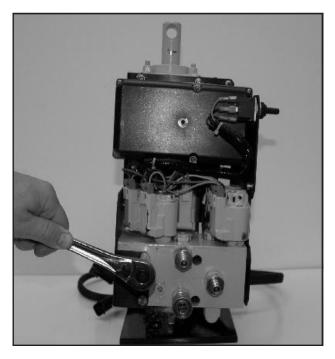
Remove two 1/4" bolts using a 7/16" Socket or wrench.
